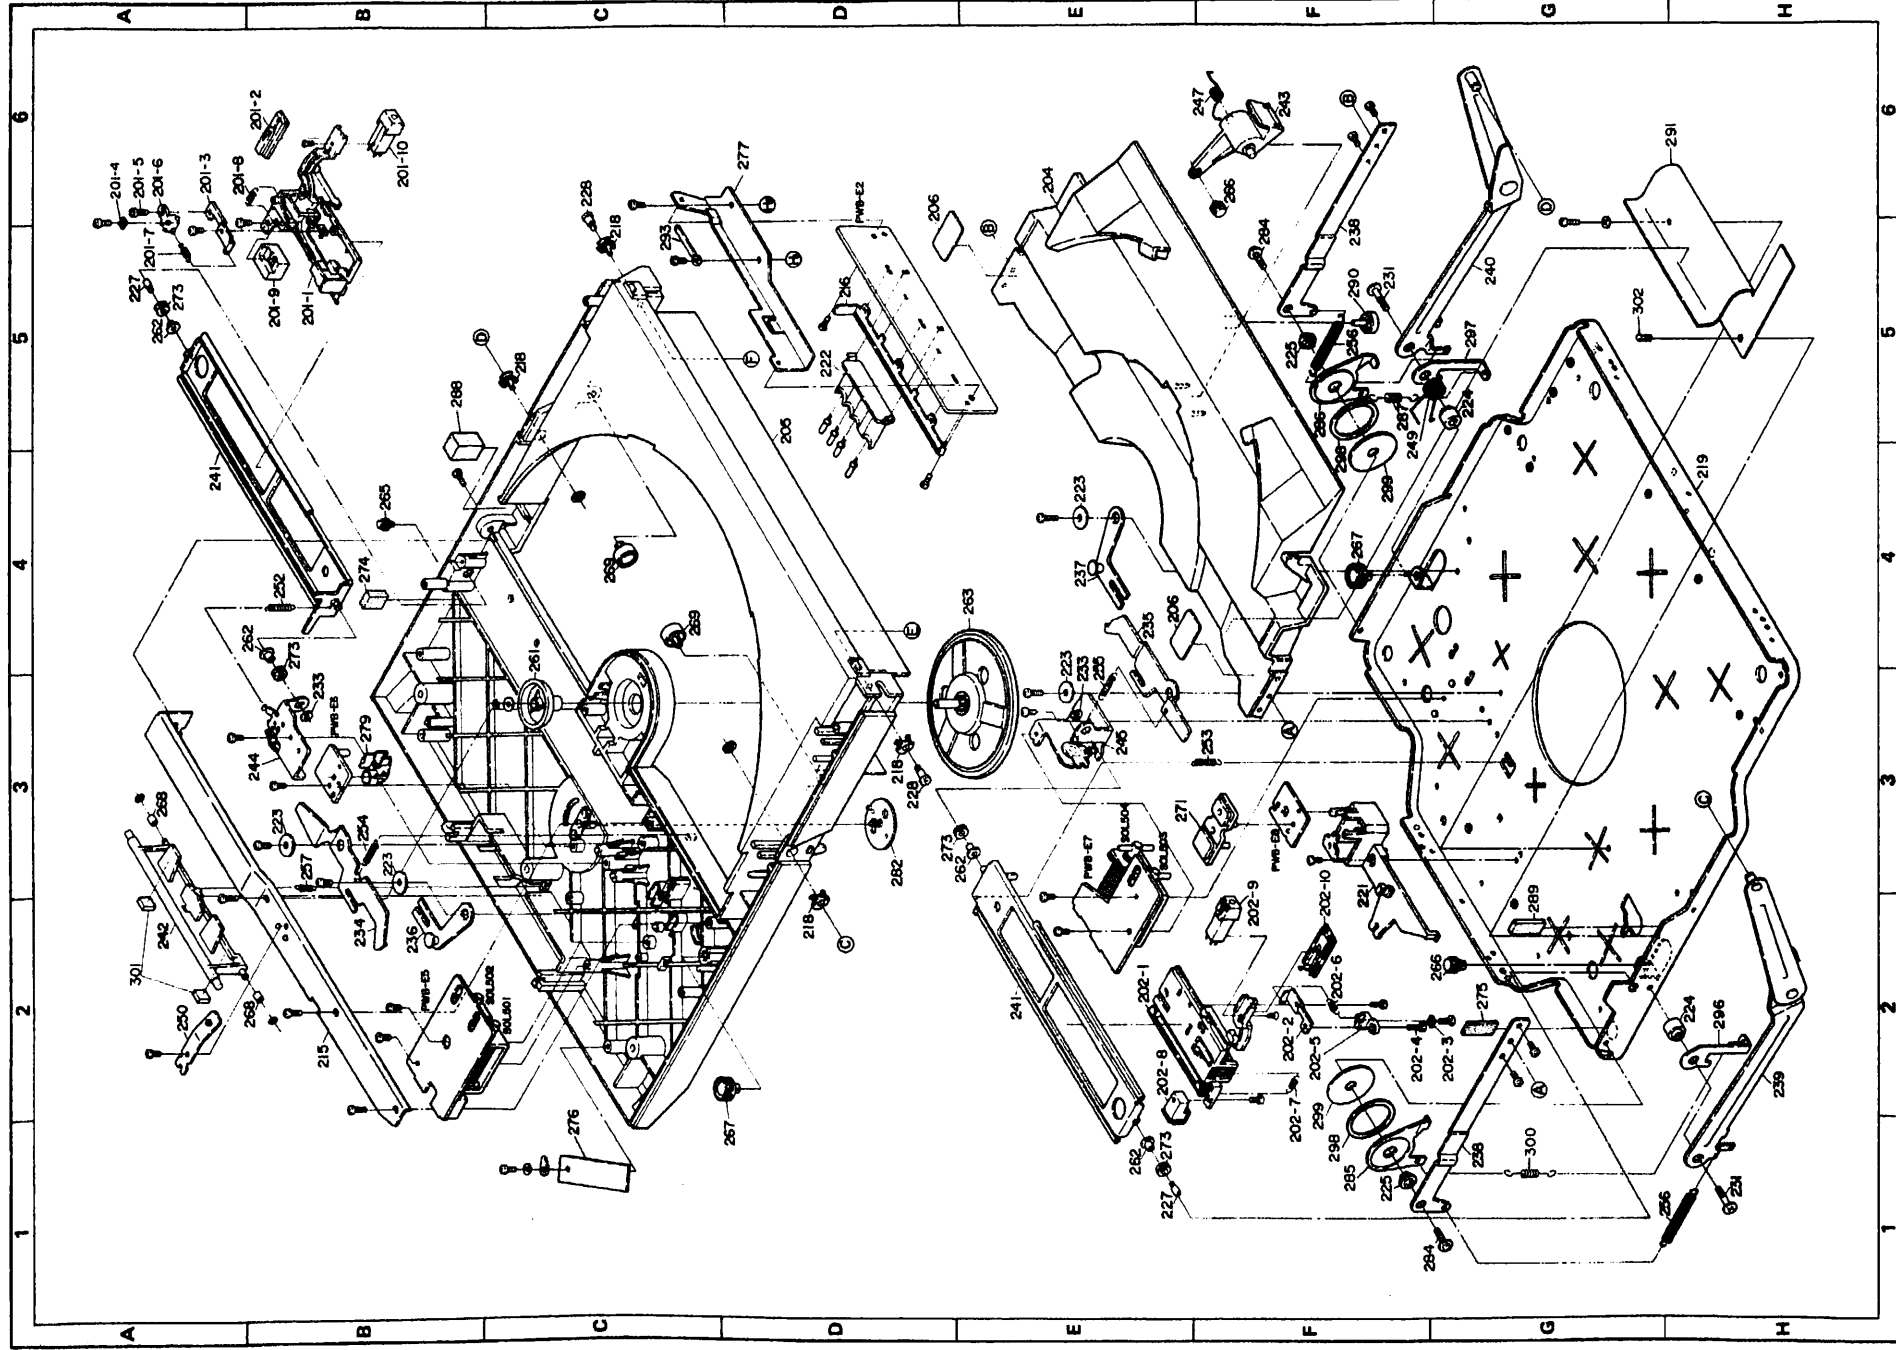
PLAYER MECHANISM EXPLODED TOP VIEW
